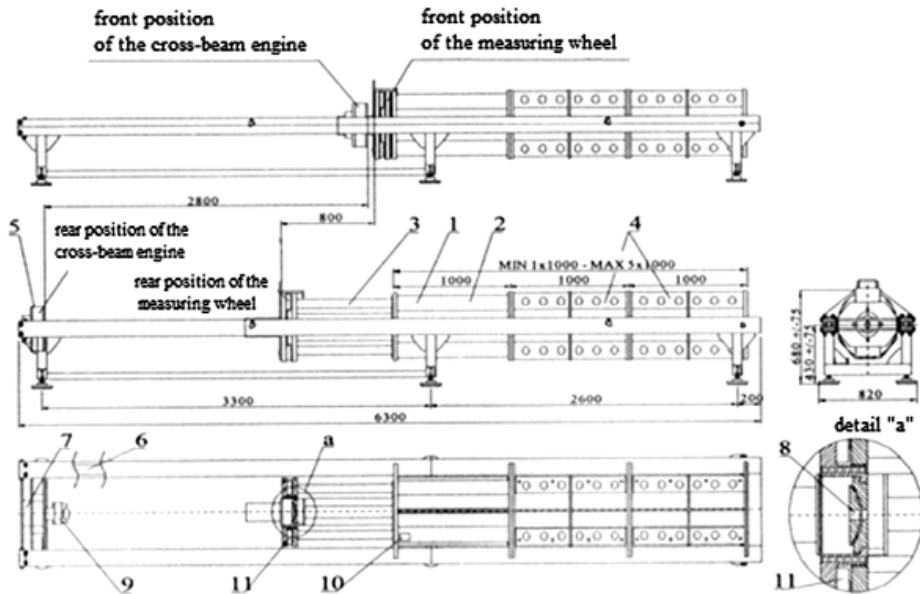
Cylinder blocks. 1 – support frame, 2 – cylinder block, 3 – cylinder, 4 – dual bushings, 5 – hydraulic motor crossbeam, 6 – rock bolt support cylinders, 7 – rotary cam engine, 8 – support plate, 9 – three jawed clamp, 10 – displacement registration sensor, 11 – force registration sensor
